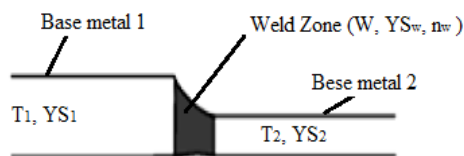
Tailor Welded Blank (TWB) [15]
